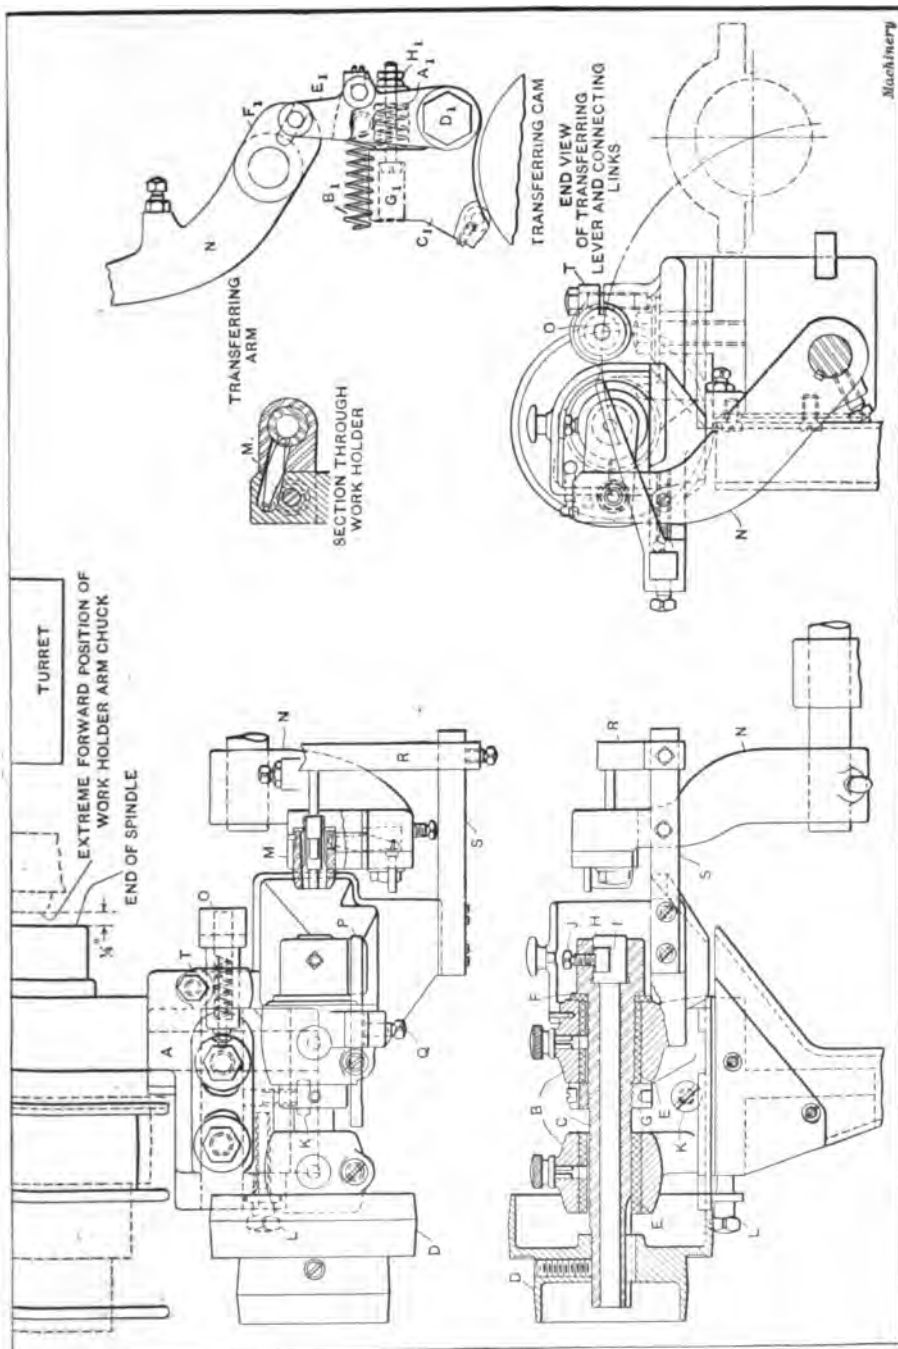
Plan, Sectional and End Views of the Burrer Attachment used on the No. 10 Brown & Sharpe Automatic Screw Machine
